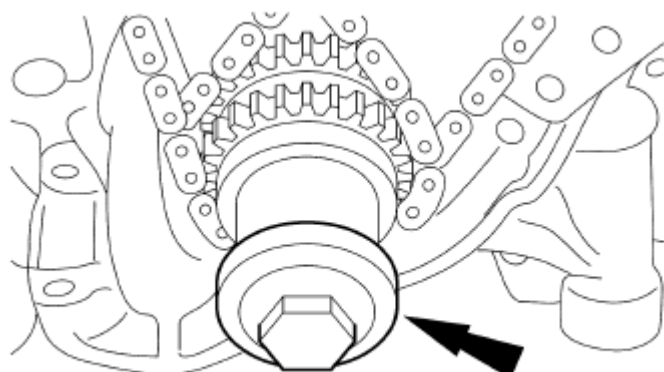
Locating Crankshaft Pulley Bolt & Washer
